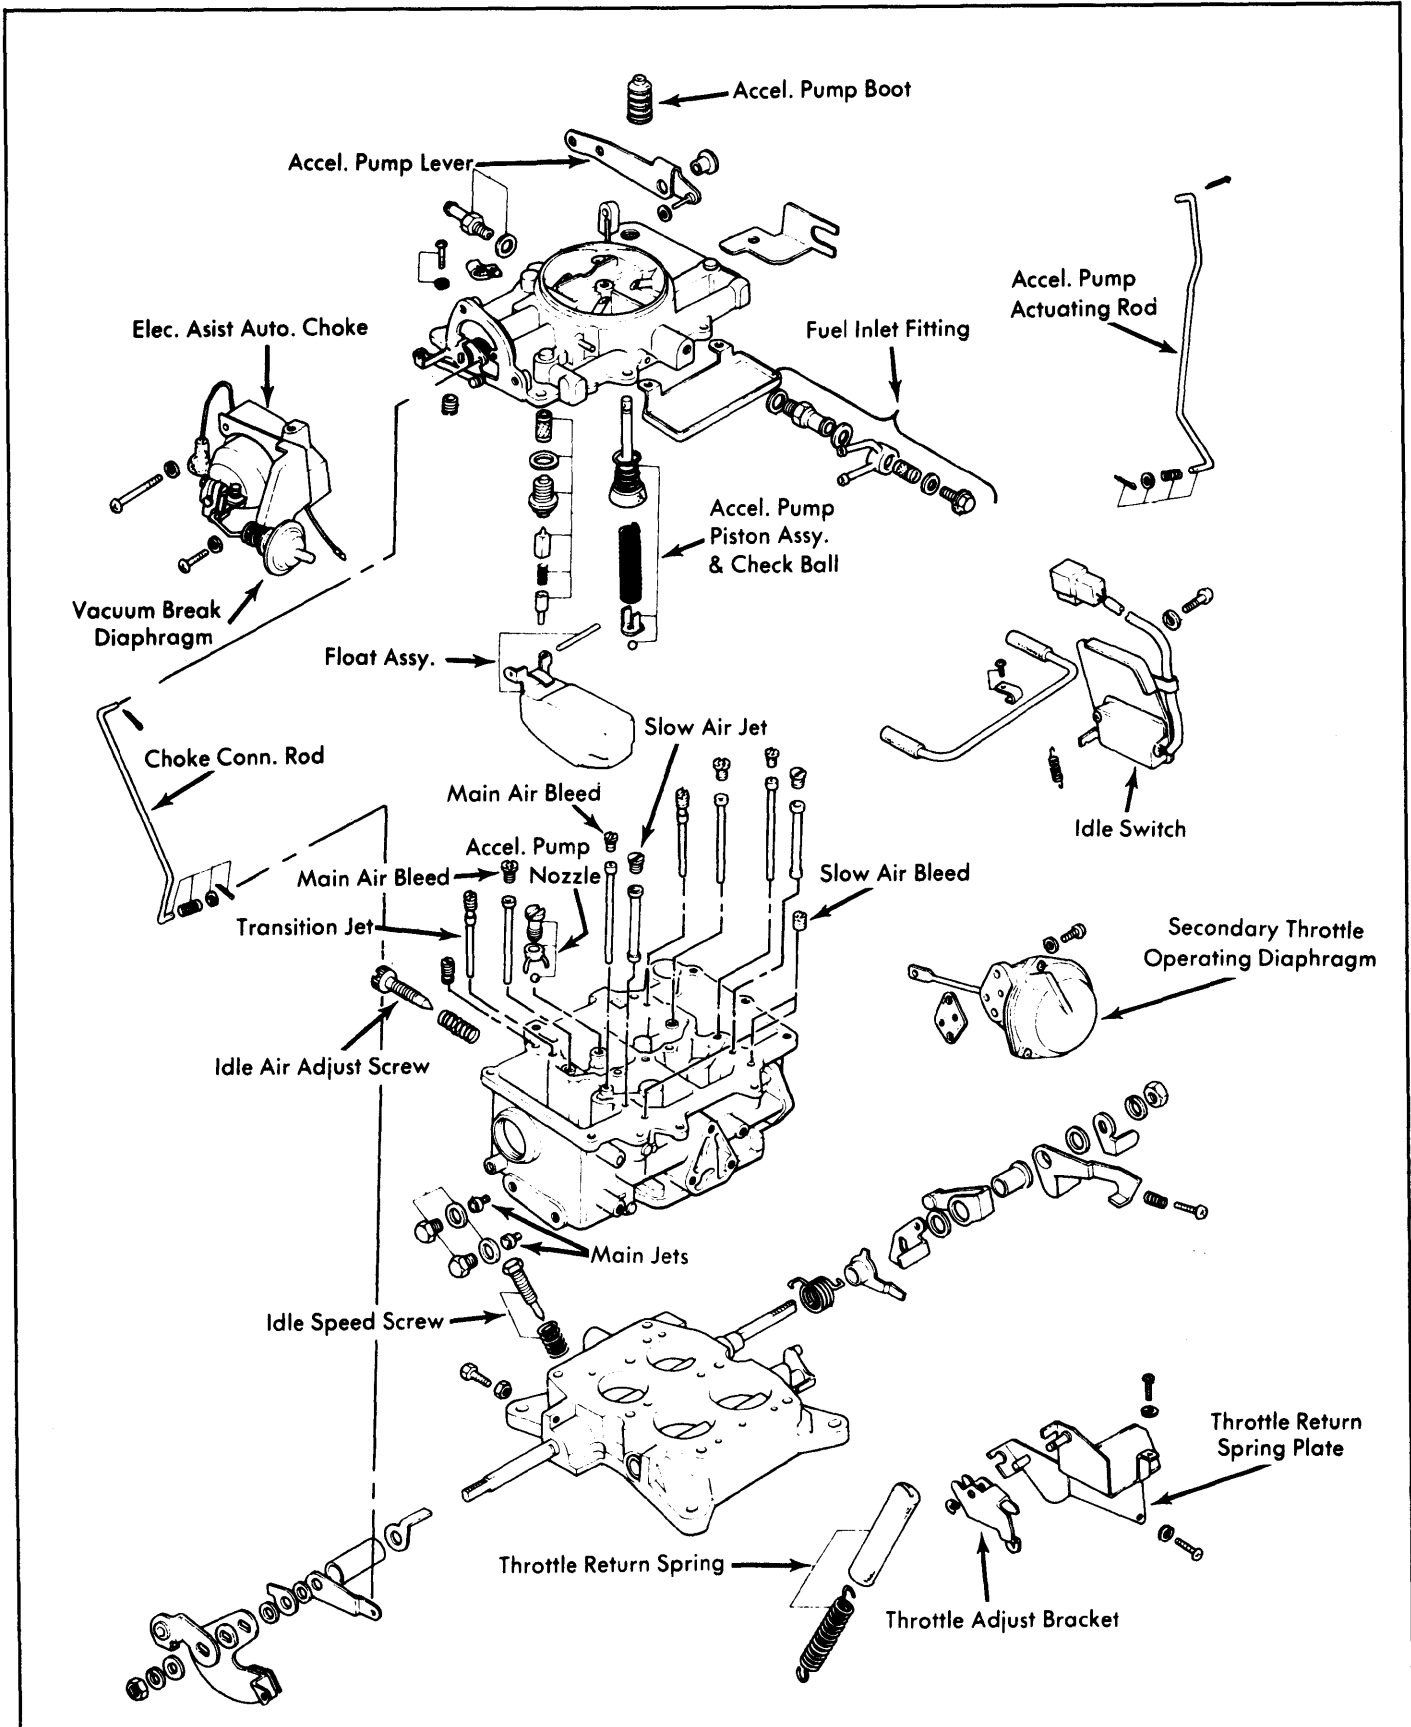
Exploded View Of Zenith-Stromberg 4-Barrel Carburetor (All Other Models)
